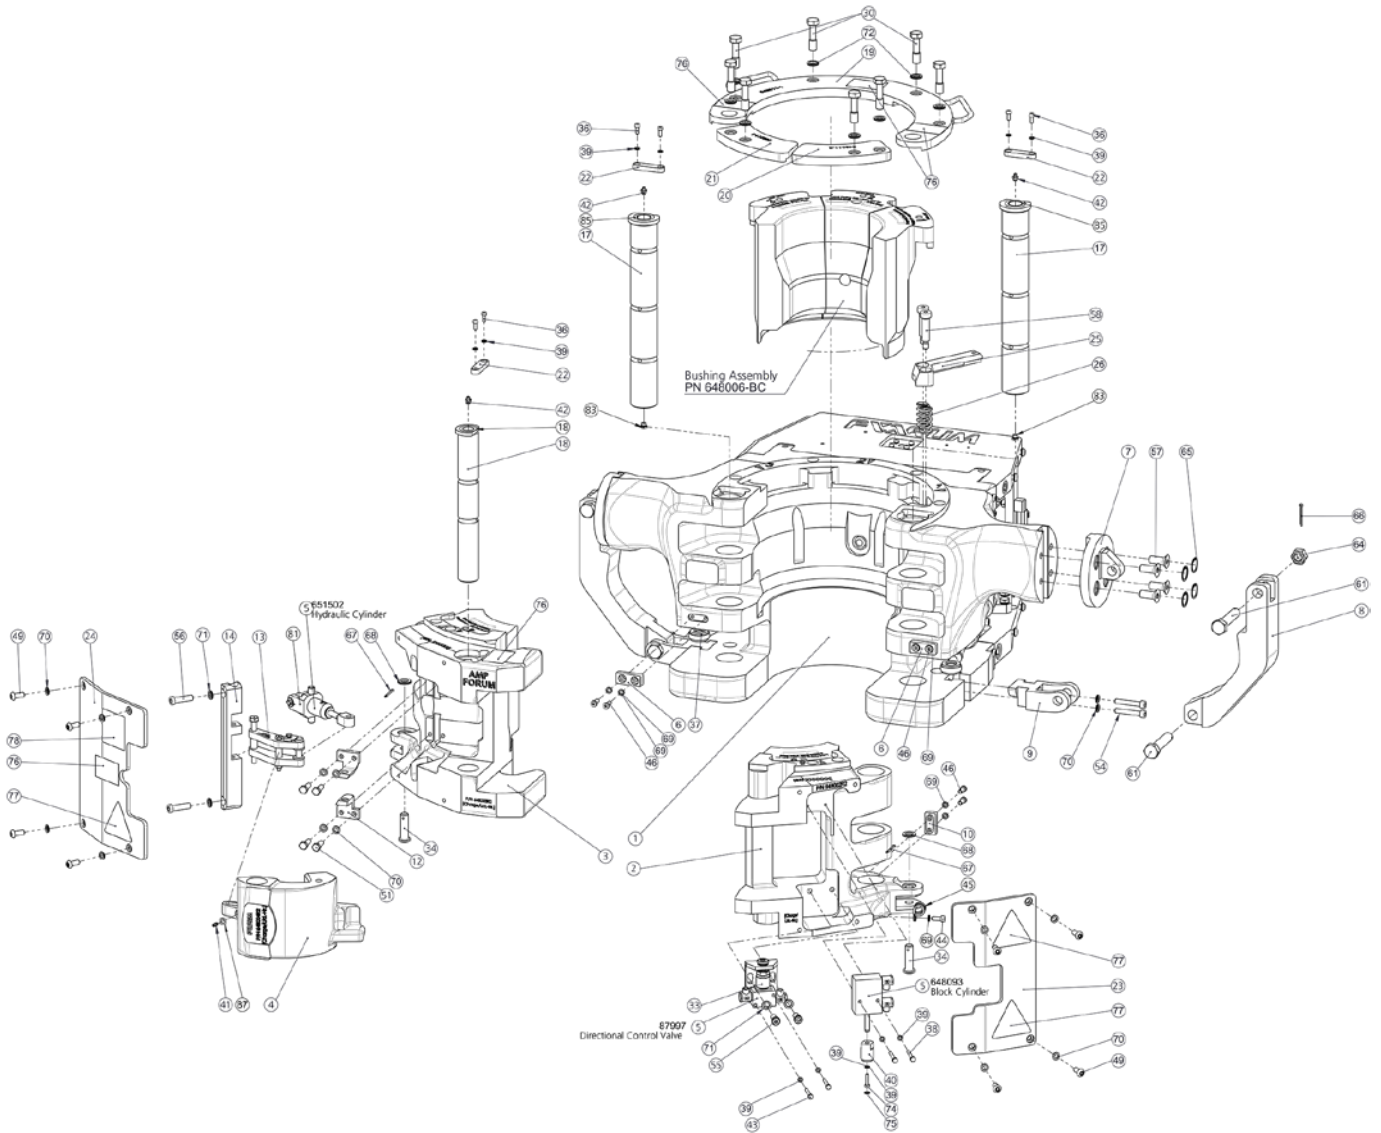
648100-Y AMP®-500/1 Drawing I
